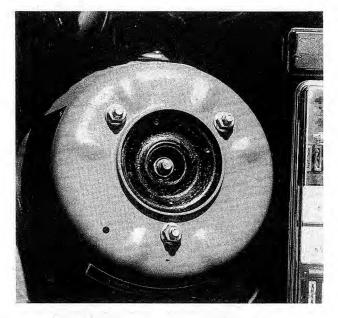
Three mounting points of upper strut mount. Available replacement mount moves strut off-center to alter front wheel camber.
